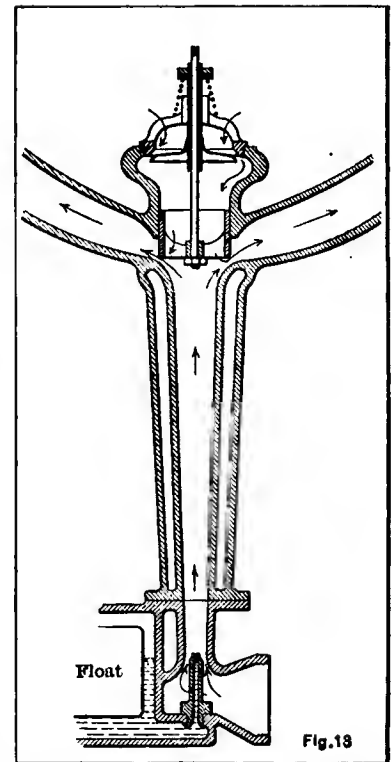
Carburetor having hot-water-jacketed mixing pipe with throttle at the junction with manifold
